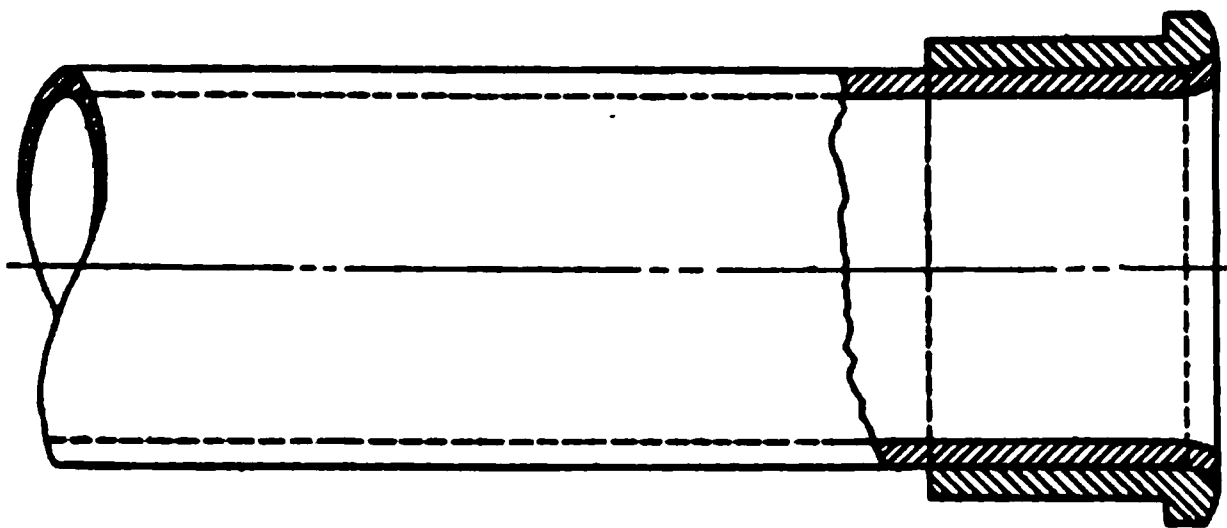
Proper application of sleeve to copper pipe with brazed joint.
